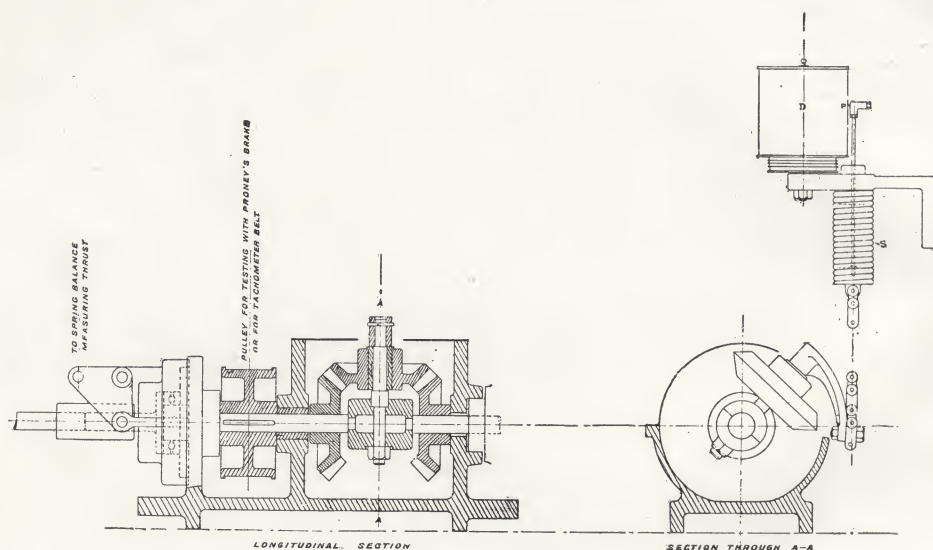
Torque Dynamometer and Thrust Indicator.
